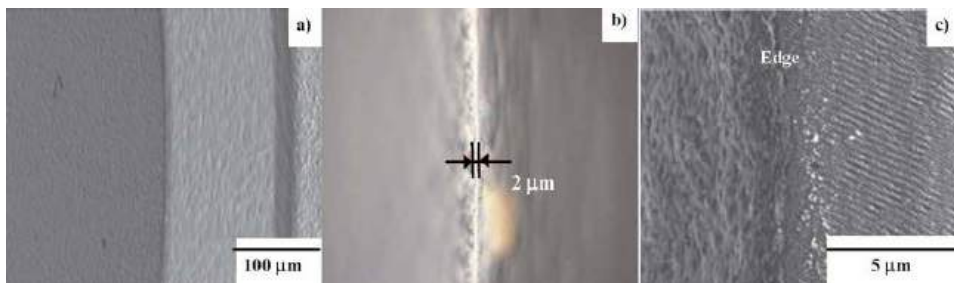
shows the laser-trimmed punch profile after surface cleaning. The maximum roughness of punch head is reduced down to 0.5  $\mu\text{m}$  on the measured surface profile. Both head and side surfaces are laser-trimmed so that the punch edge is considered to be sharpened as an intersection of two surfaces.
